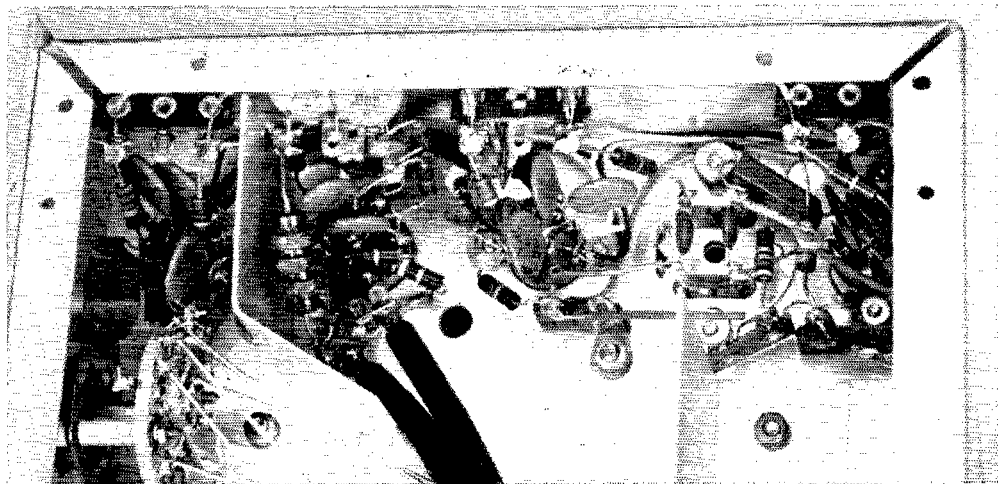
A close-up of the wiring around the tunable-oscillator/buffer socket (to the right of bent shield plate) and the crystal-oscillator/buffer socket in the upper left corner. The metal center post of the socket is connected to the chassis through a soldering lug fastened under one of the socket mounting nuts; this is the single ground point for the stage. The same method of grounding is used in each stage. Disk capacitors are directly over the sockets to shield the oscillator and buffer sections from each other.
